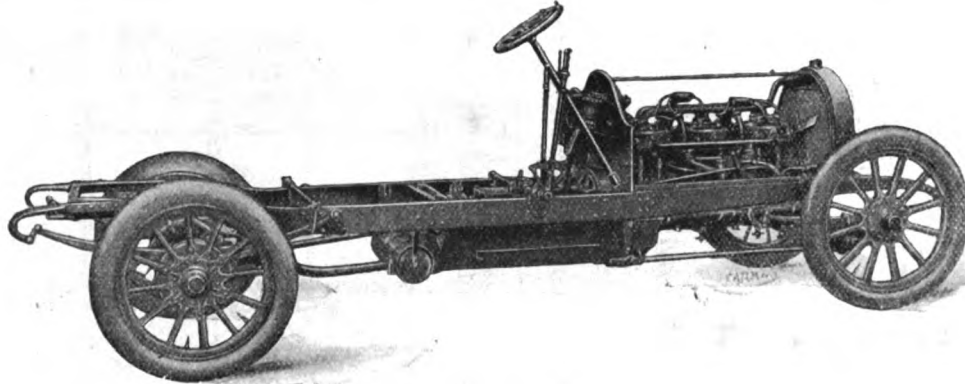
Elevation of Chassis of Hotchkiss Six-Cylinder Car.
